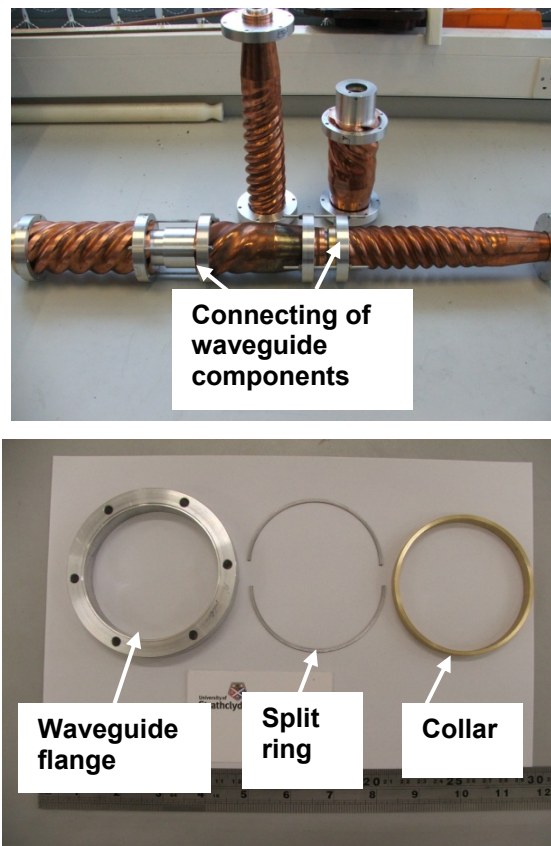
The 5-fold pulse compressor waveguide connection pieces.
